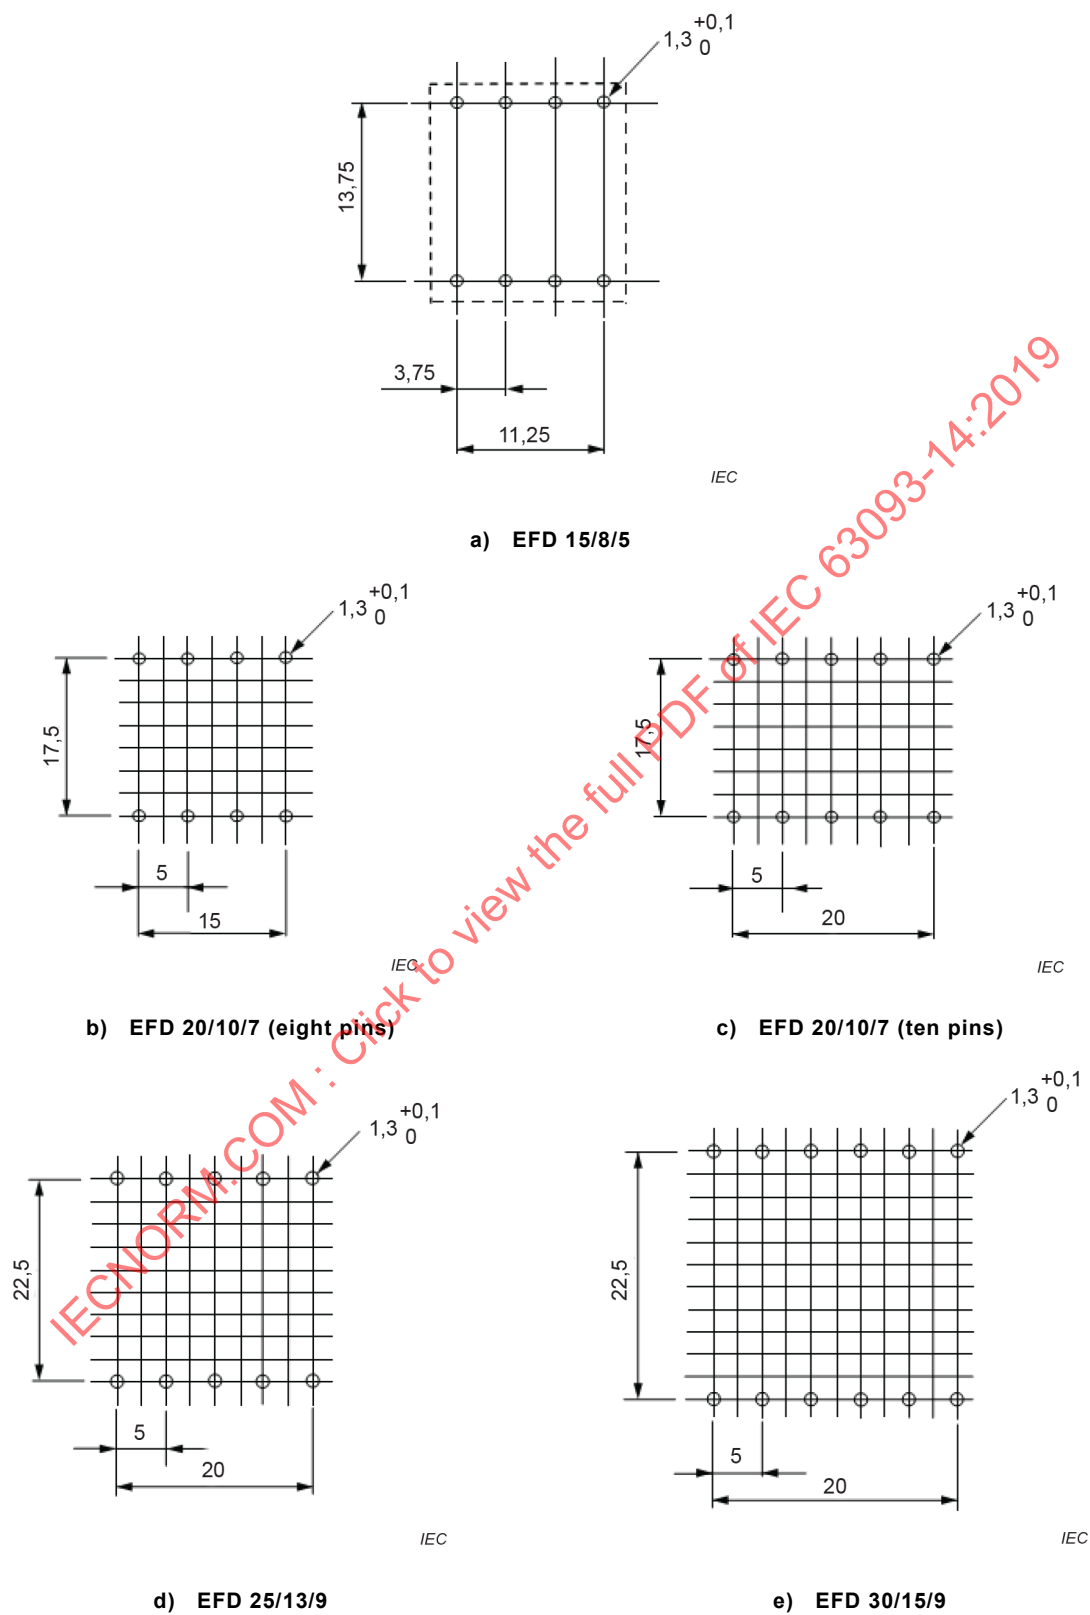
Locations of pins (PTH type) viewed from the upper side of the board
